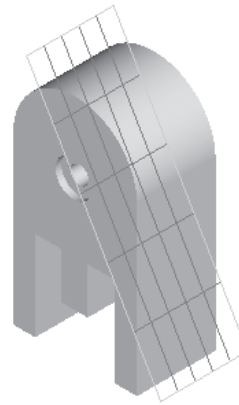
Resulting datum plane passing through the center of a cylinder
